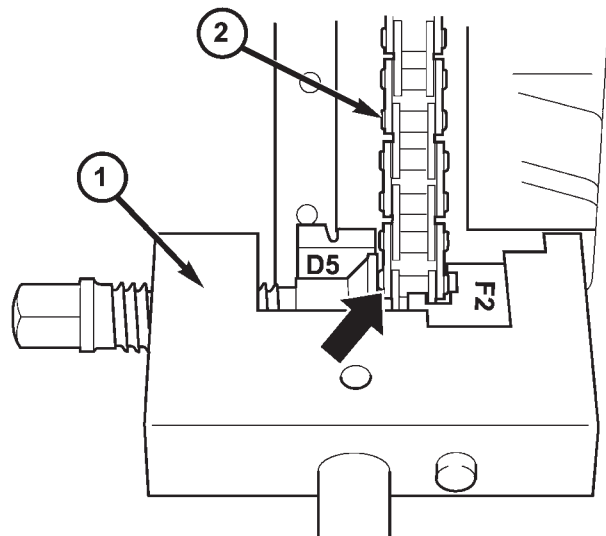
INSTALLING RIVETING INSERTS INTO RIVETING TOOL
